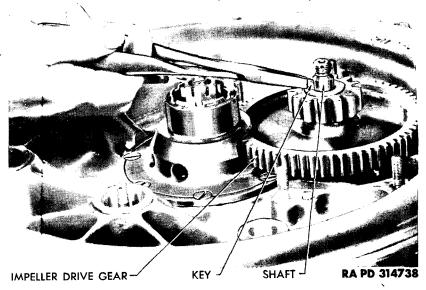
Removing Key from Impeller Driver Gear Shaft
